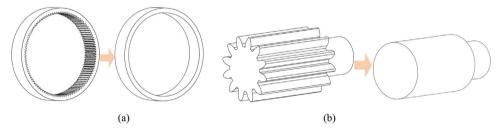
Example of an equivalent virtual shaft segment of the (a) ring gear, and (b) gear shaft.
